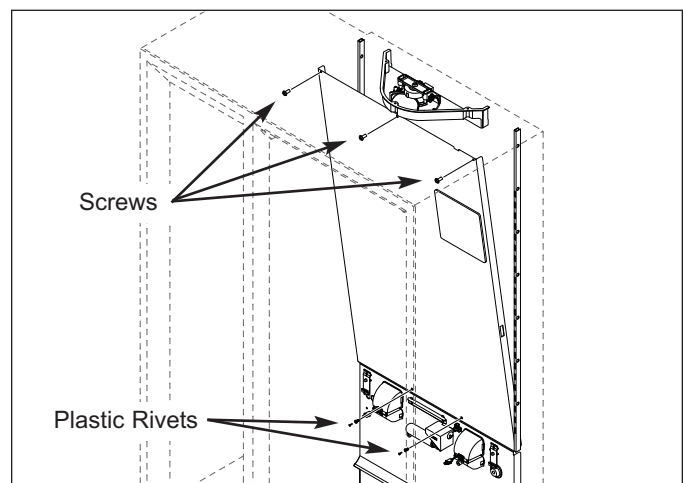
Control Panel Assembly Removal (viewed from behind)
